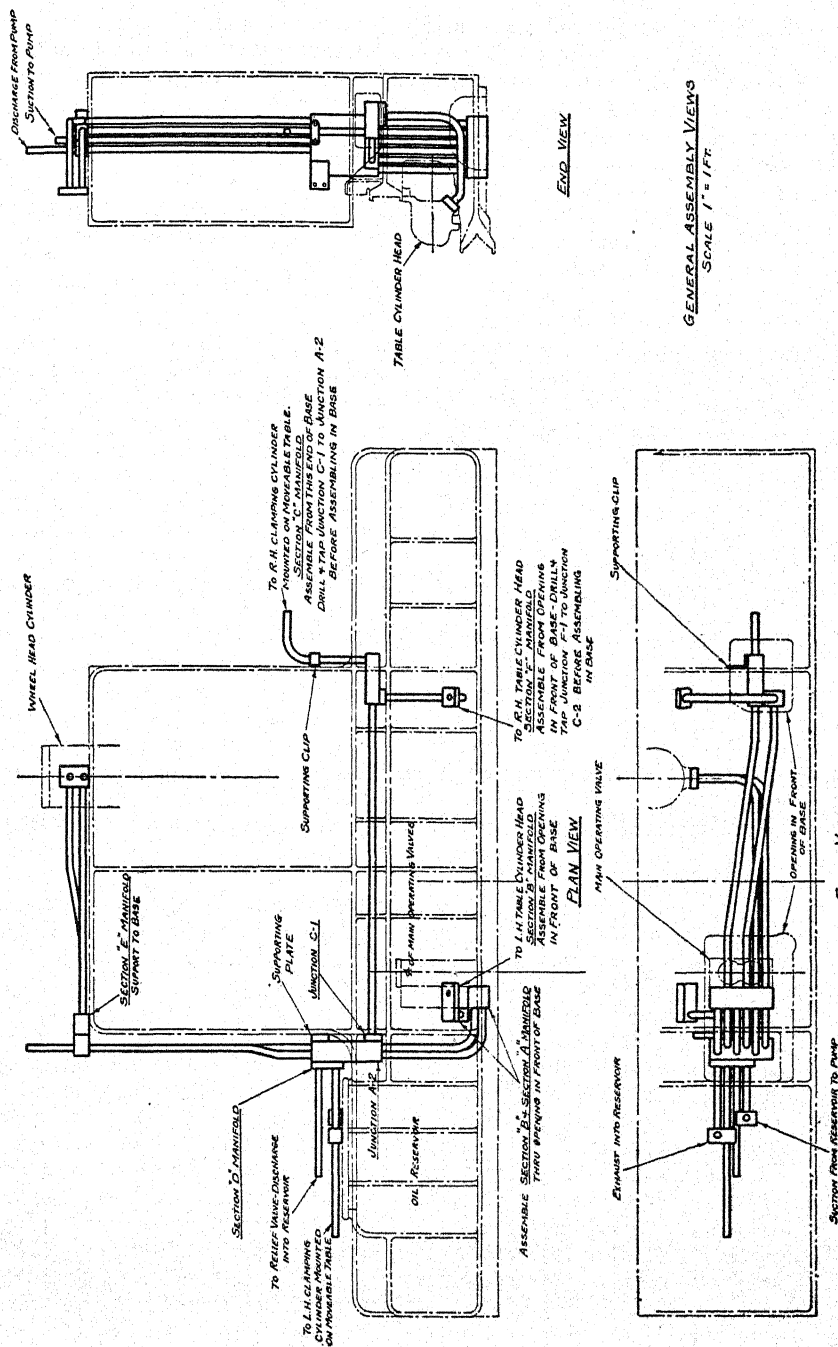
General assembly views showing connections of manifolds to each other and assembly to base.
